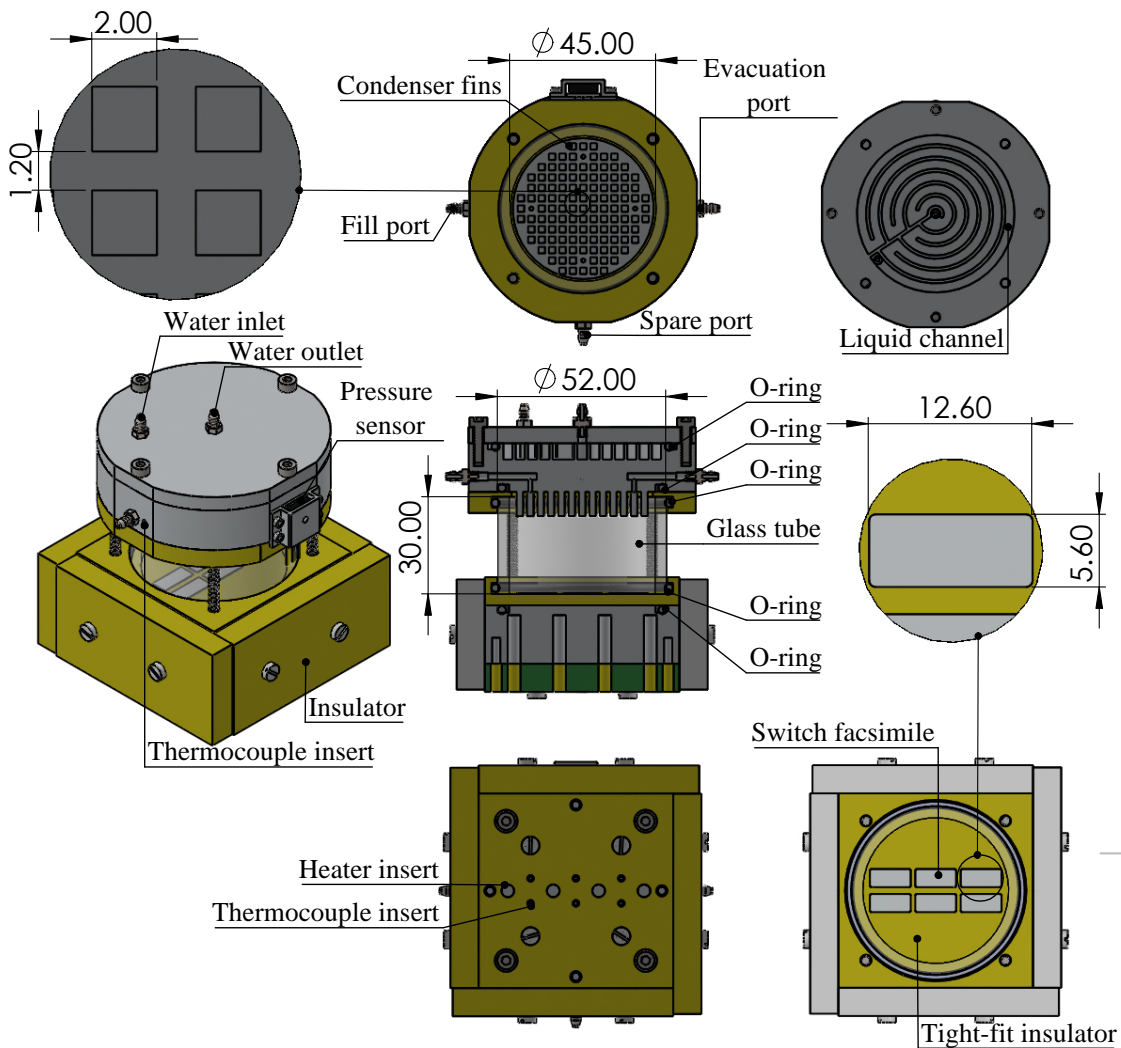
Section views of experimental apparatus. All dimensions are in millimetres.
